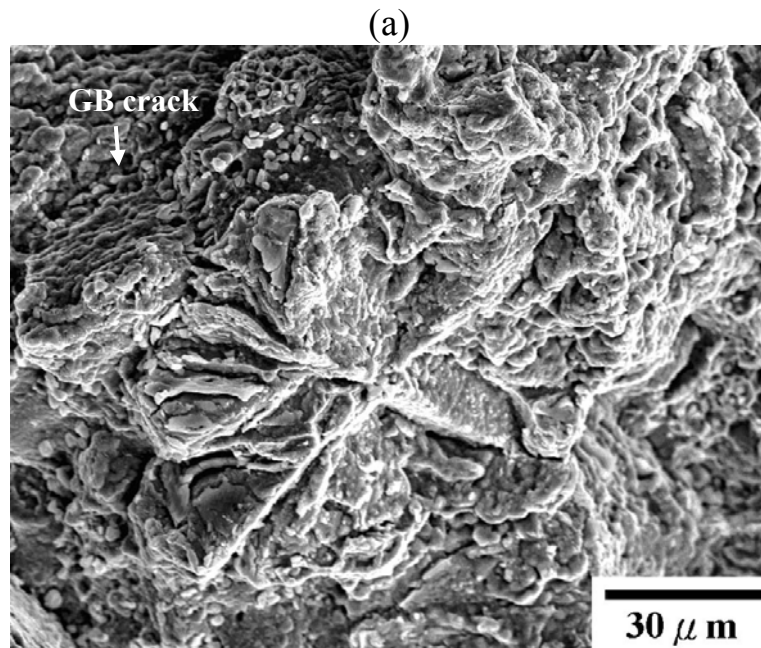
Fractographs of the alloy C(3Re) after creep test under 760°C/724MPa. (a) Fracture surface and (b) longitudinal section.
